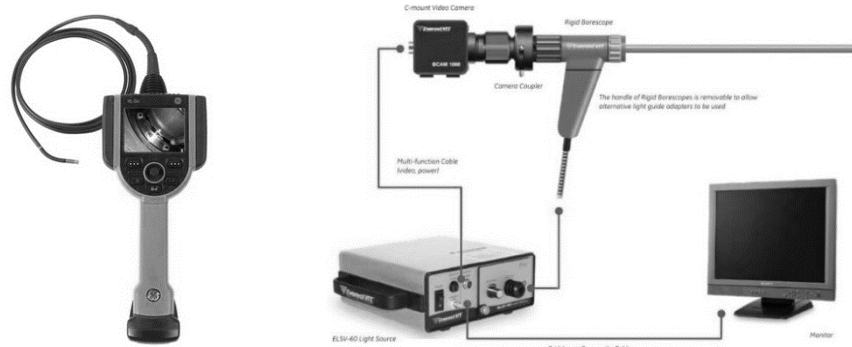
Direct visual testing kit for weldment inspection. [37]
